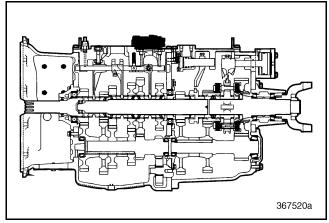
Range Shift Valve Component Locator (T313L21/T318L21 Shown)
